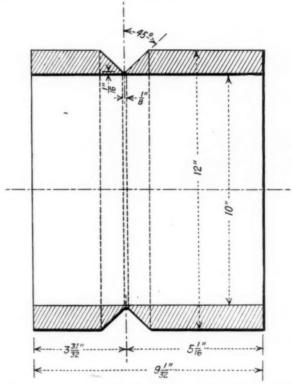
Shows Preparation of Cast-Iron and Steel Pots for Welding Tests.
